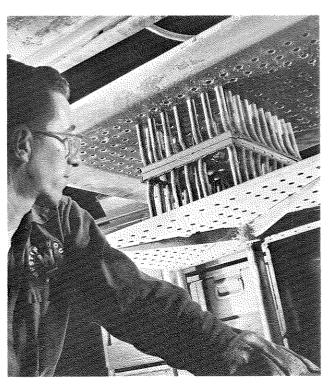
Here the operator clamps the mold halves in the glue press to permanently bond them into a complete shell mold.
